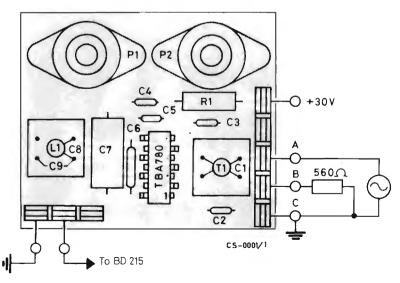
P.C. board layout, 1:1 scale (fig. 2 circuit)
